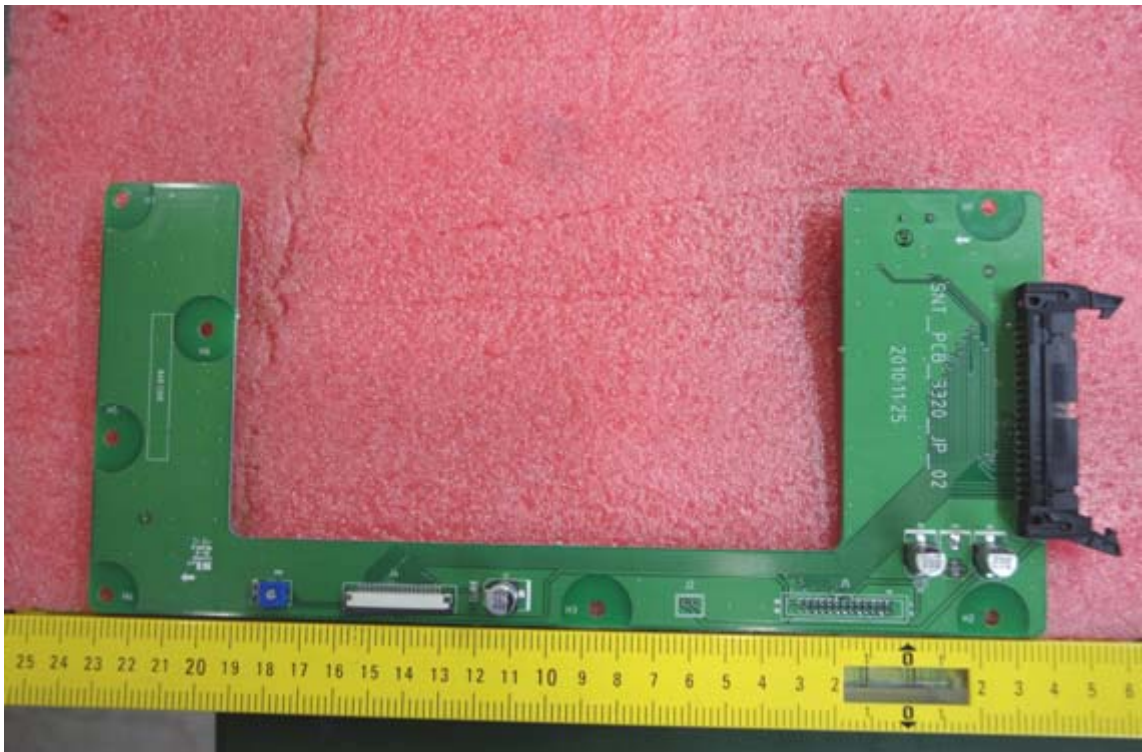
Board SNT\_PCB\_3320\_JP, component side view
